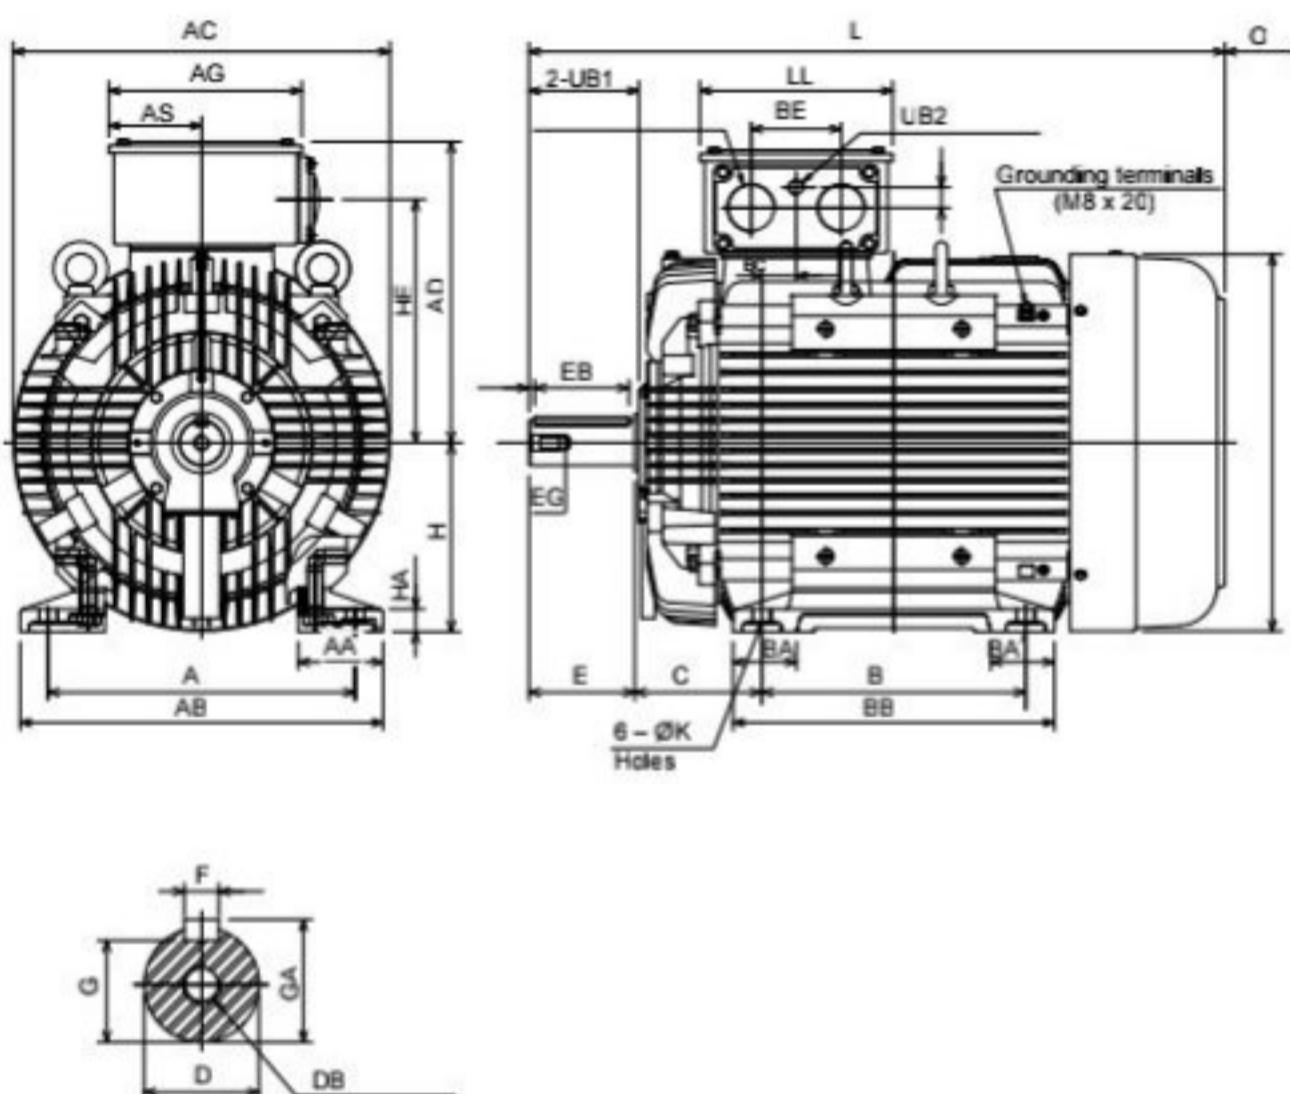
Outline drawing of cast iron design, feet version, mounting B3; frame size 200 – 250 (sample)
